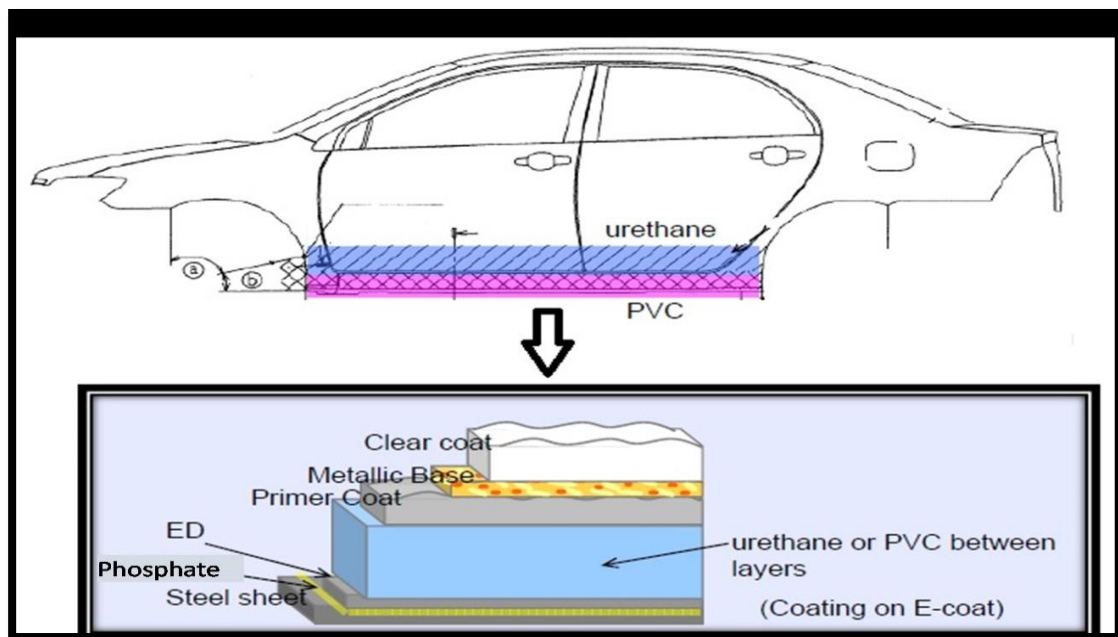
The Anti-Chipping material Coating on Lower doors and rocker panels
